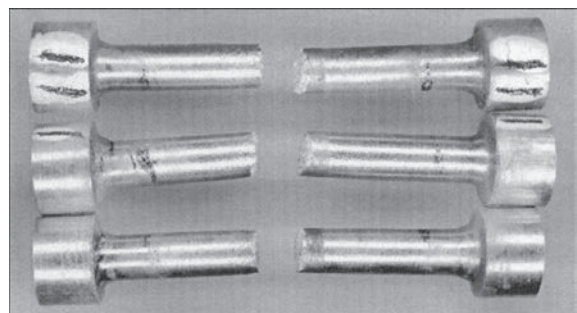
EB-welded specimens of magnesium alloy ML10 after mechanical pulling tests
